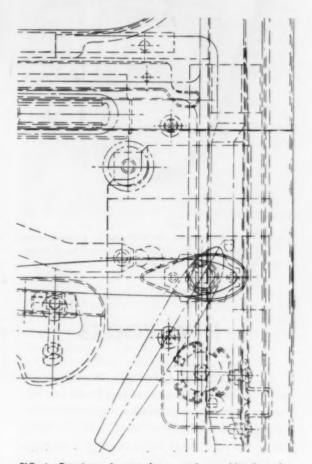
Drawings of many sheet metal assemblies have become very complex, as shown in this illustration.
